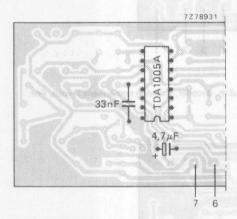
Printed-circuit board component side, showing component layout of Fig. 13.
